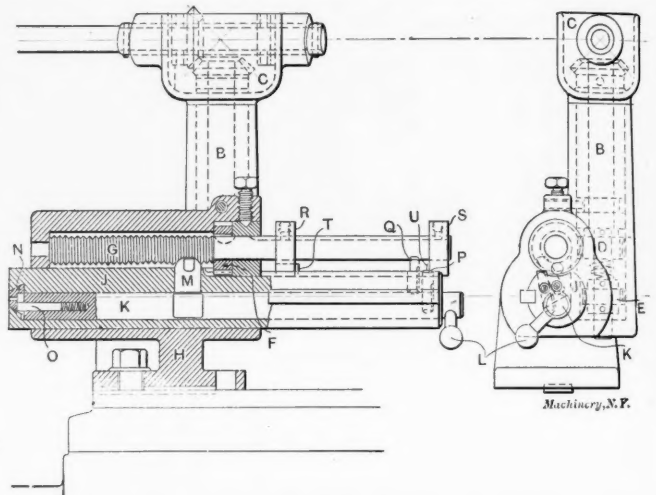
Construction of the Mechanism of Chasing Attachment.
